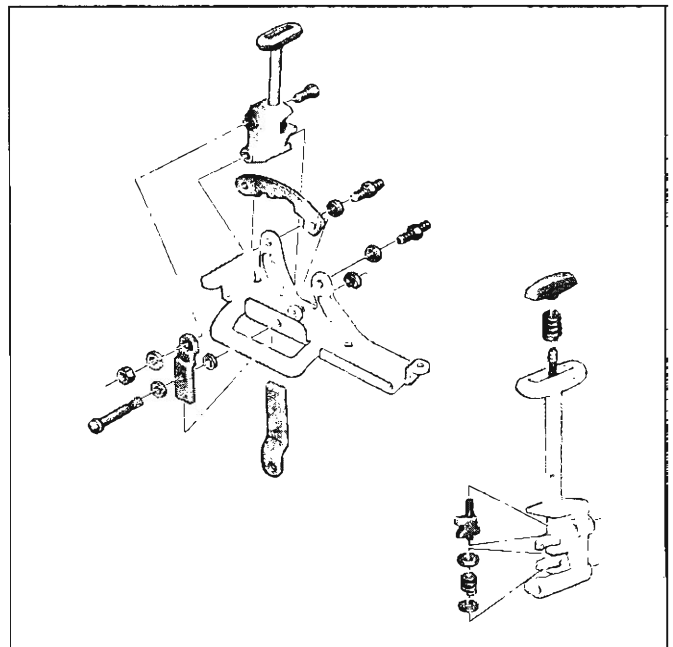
PG—Floor Mounted Control Lever and Bracket Assembly (Chevrolet Shown)
